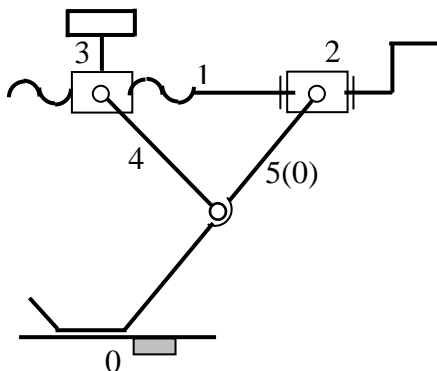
Lifting mechanism with screw and a flexible support bar
